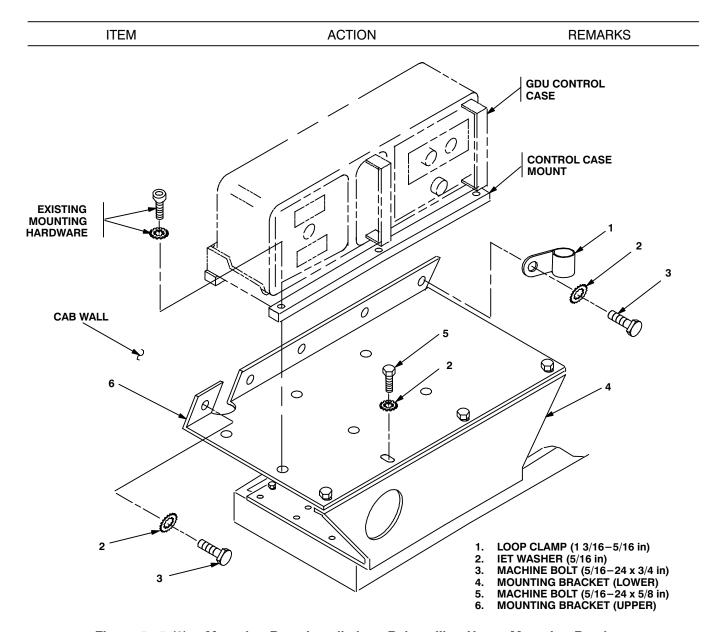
(3). Mounting Base Installation: Reinstalling Upper Mounting Bracket
